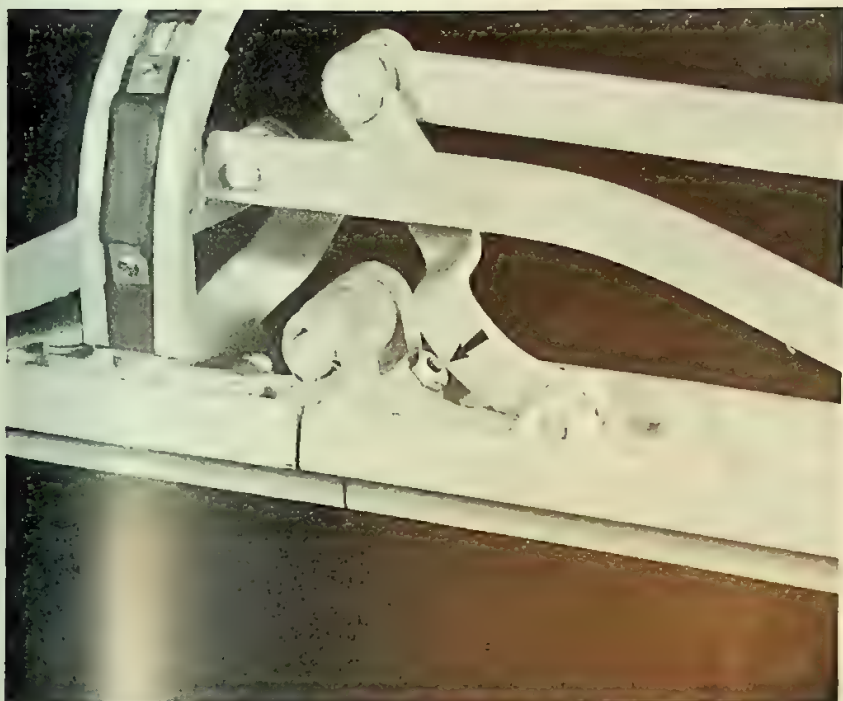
Hump at Hinge in Center of Side Rail May Be Eliminated by Turning Adjusting Screw.
